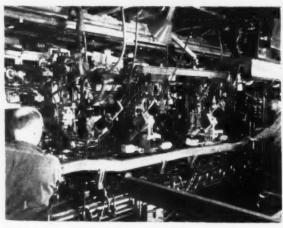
Six submerged-arc welding heads automatically and simultaneously move into position after the side rail assembly is clamped vertically and horizontally. The heads are guided along the seams by a tracer and contour compensating device for accurate alignment of the welding wire with the joint.
